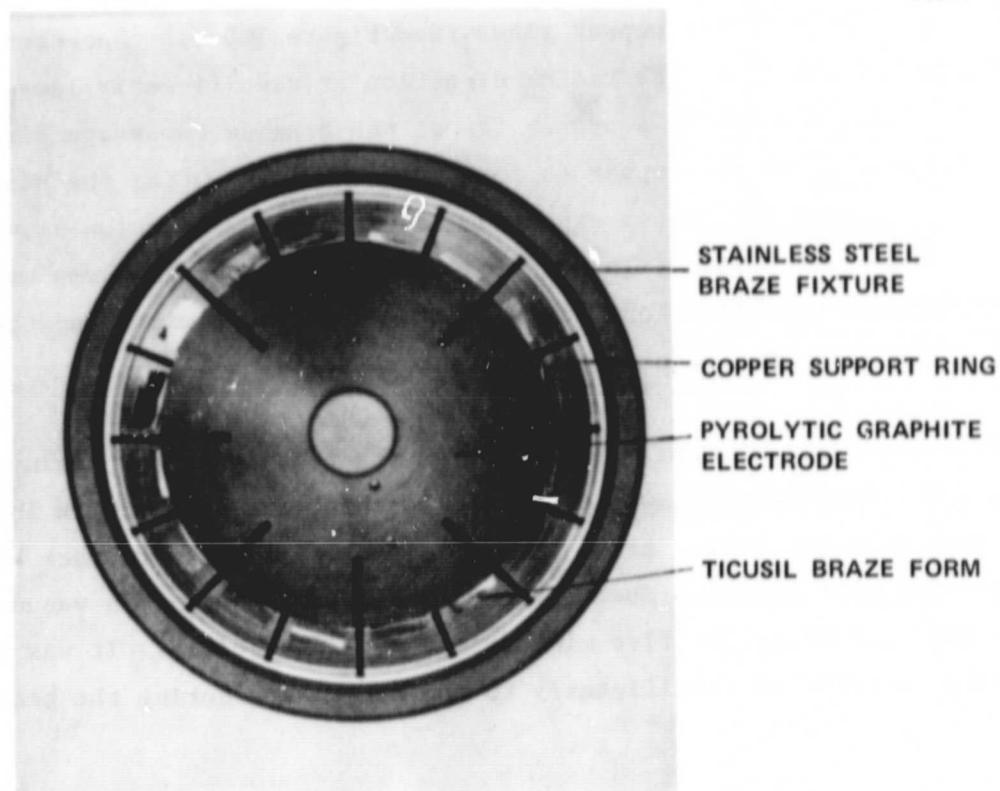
PG collector subassembly in braze fixture prior to brazing. Note: Varying braze form lengths on copper tabs of support ring. Mag. 1.1X.
